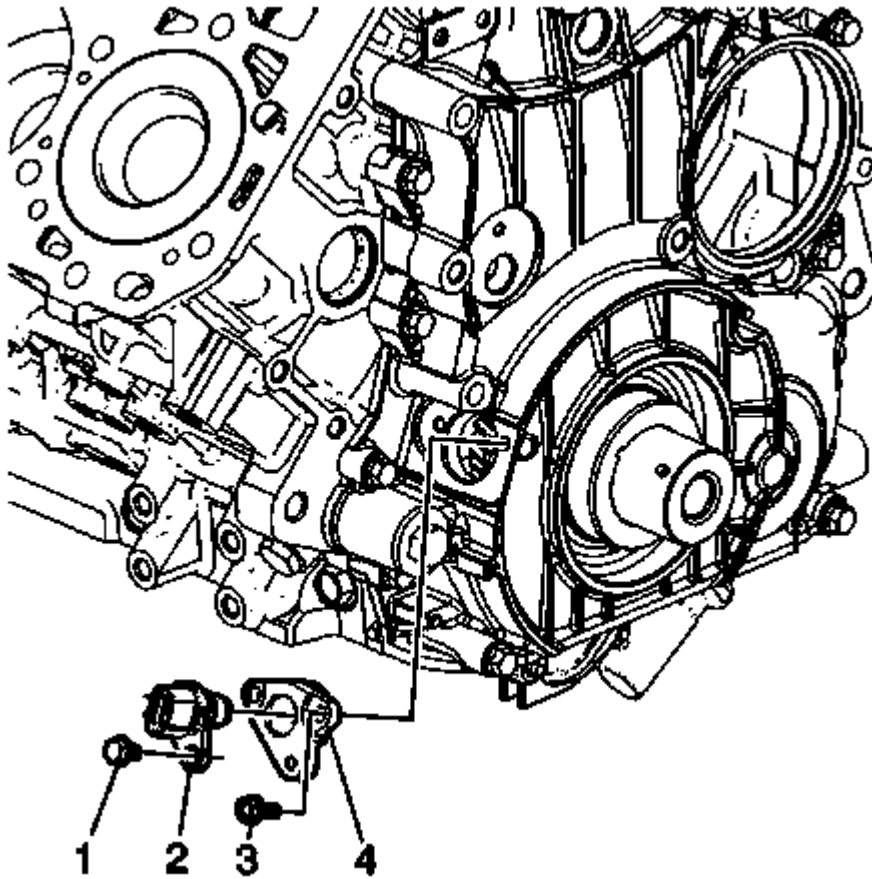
Identifying Crankshaft Position Sensor, Bolts And Spacers
